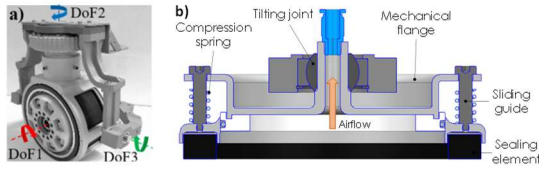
UMA-2 (a) wheel module and (b) vacuum chamber.
